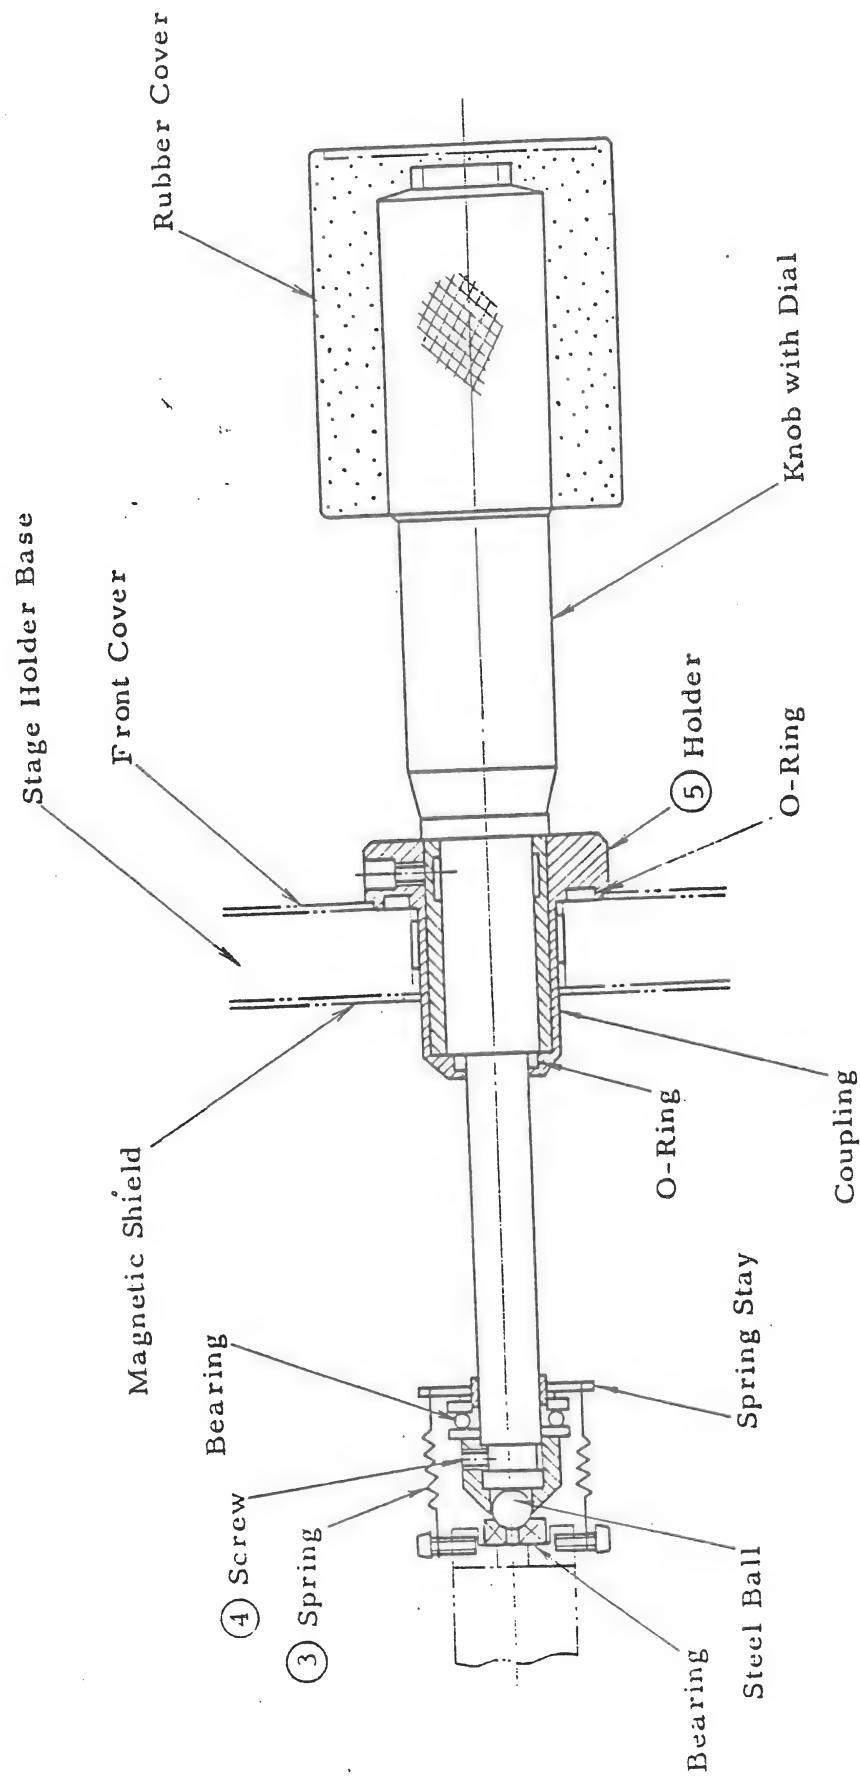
Construction of X, Y Knobs and Drive Assembly
